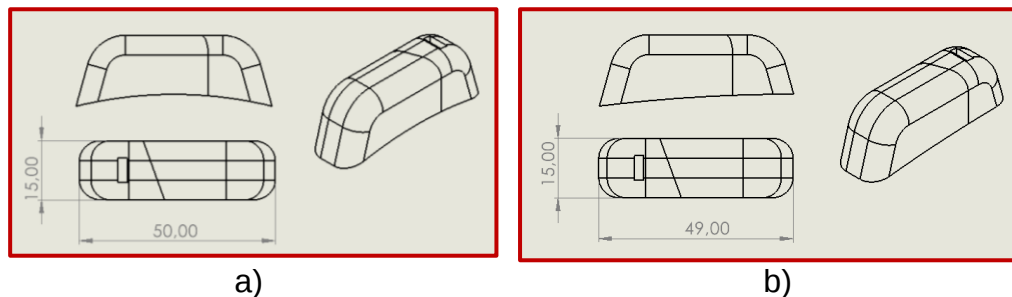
Dimensions of the length and thickness of the 2 types of cylindrical mechanisms for the Right side: a) Superior Component; b) Inferior Component.
